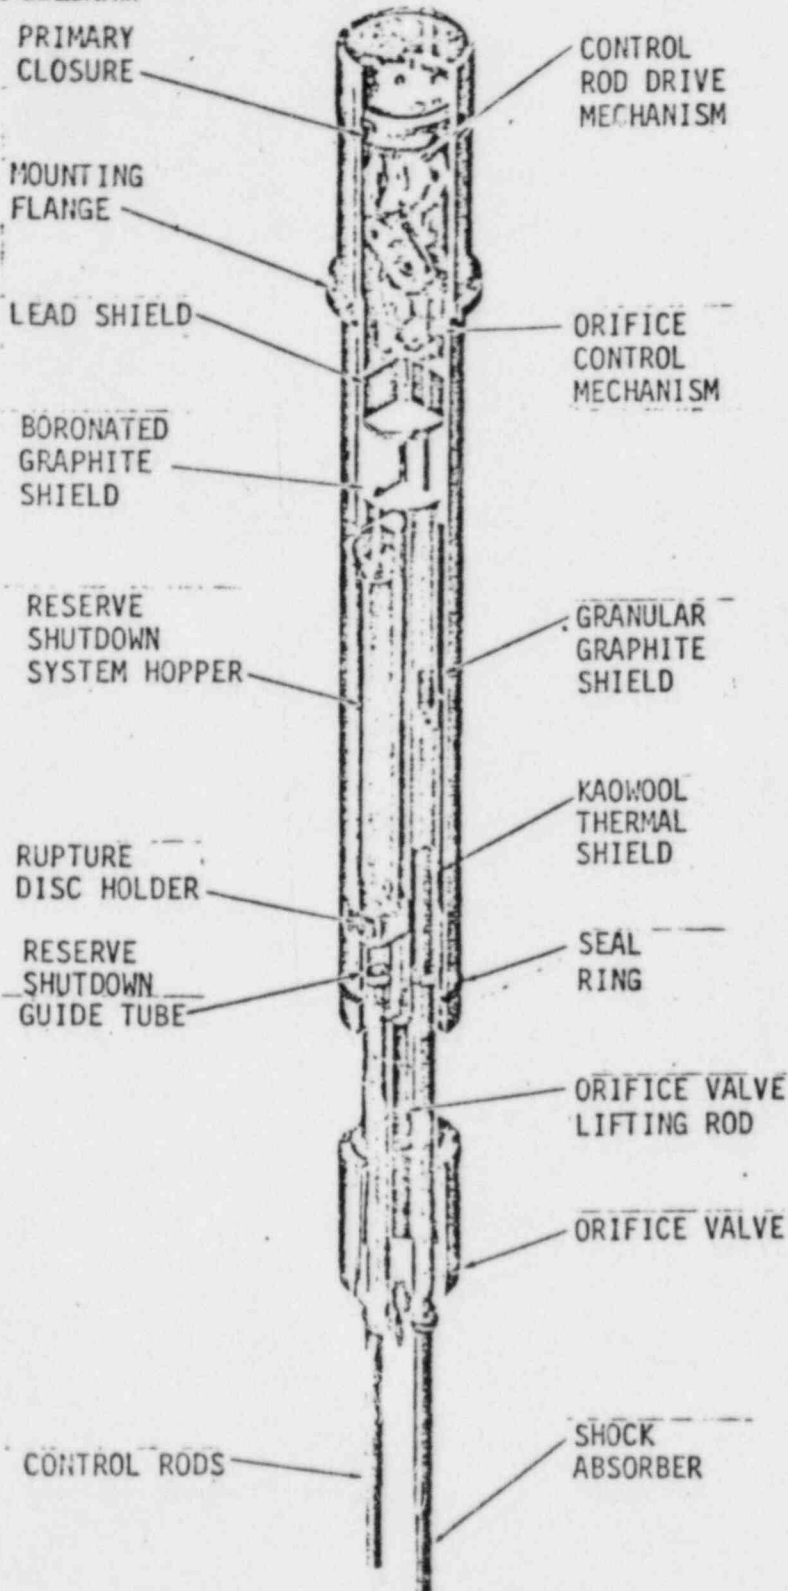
CONTROL AND ORIFICING ASSEMBLY
